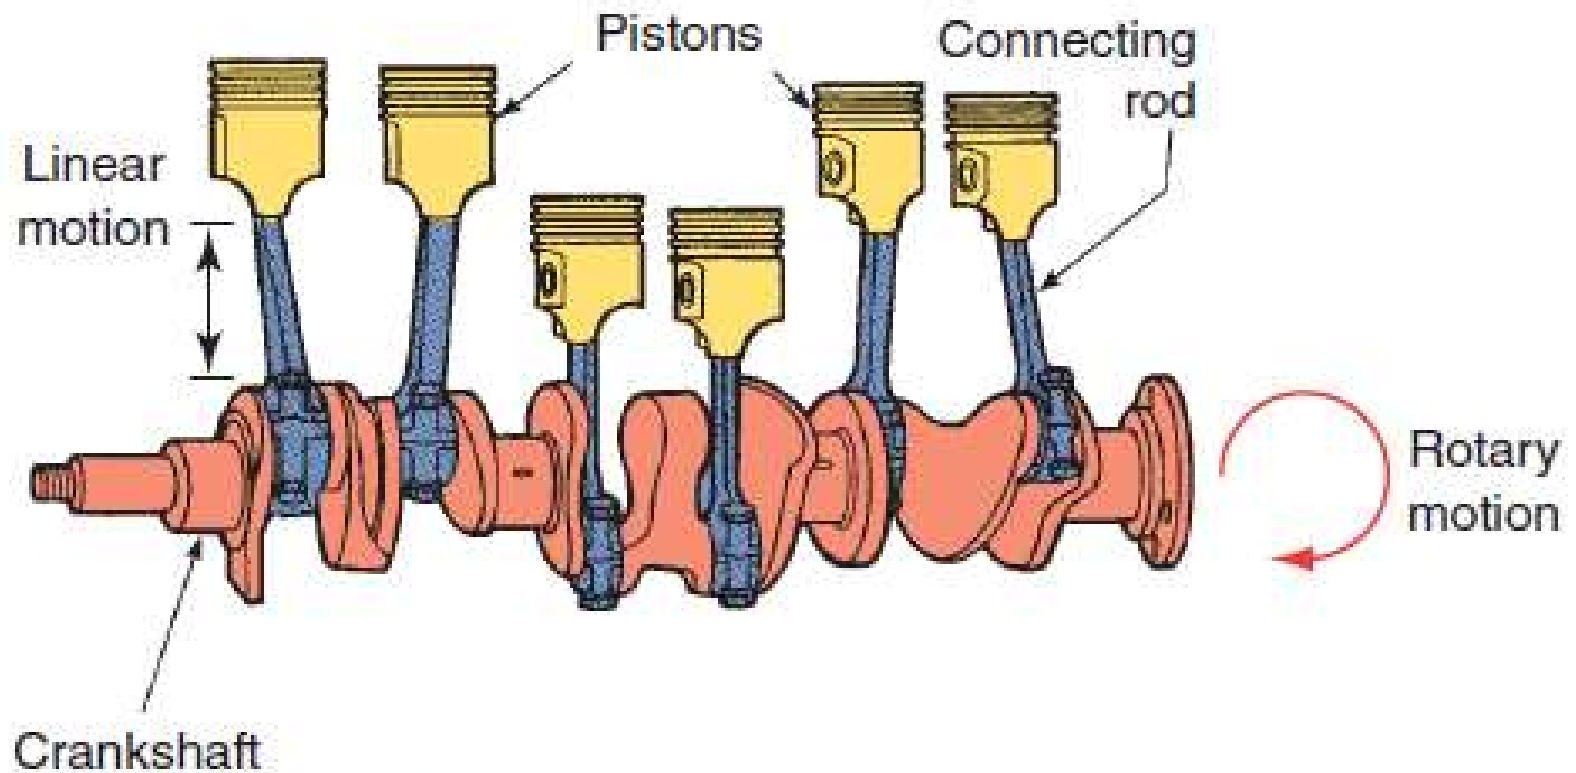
The linear (reciprocating) motion of the pistons is converted to rotary motion by the crankshaft.
